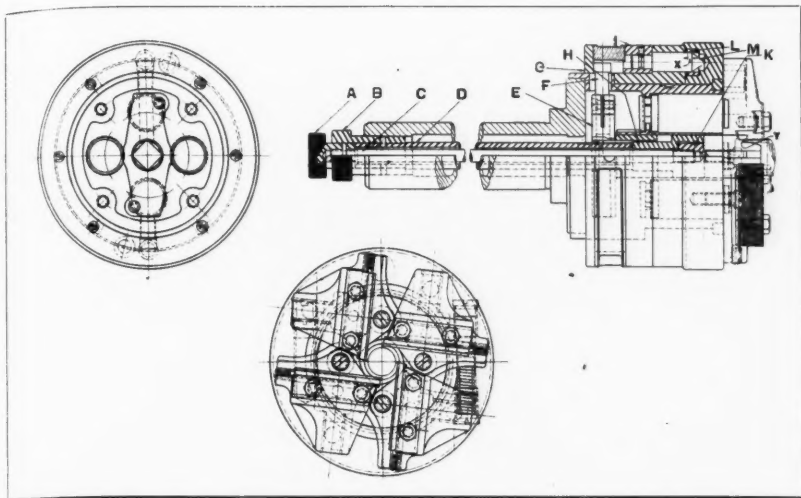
Construction Details of the Landis Internally Tripped Die-head
